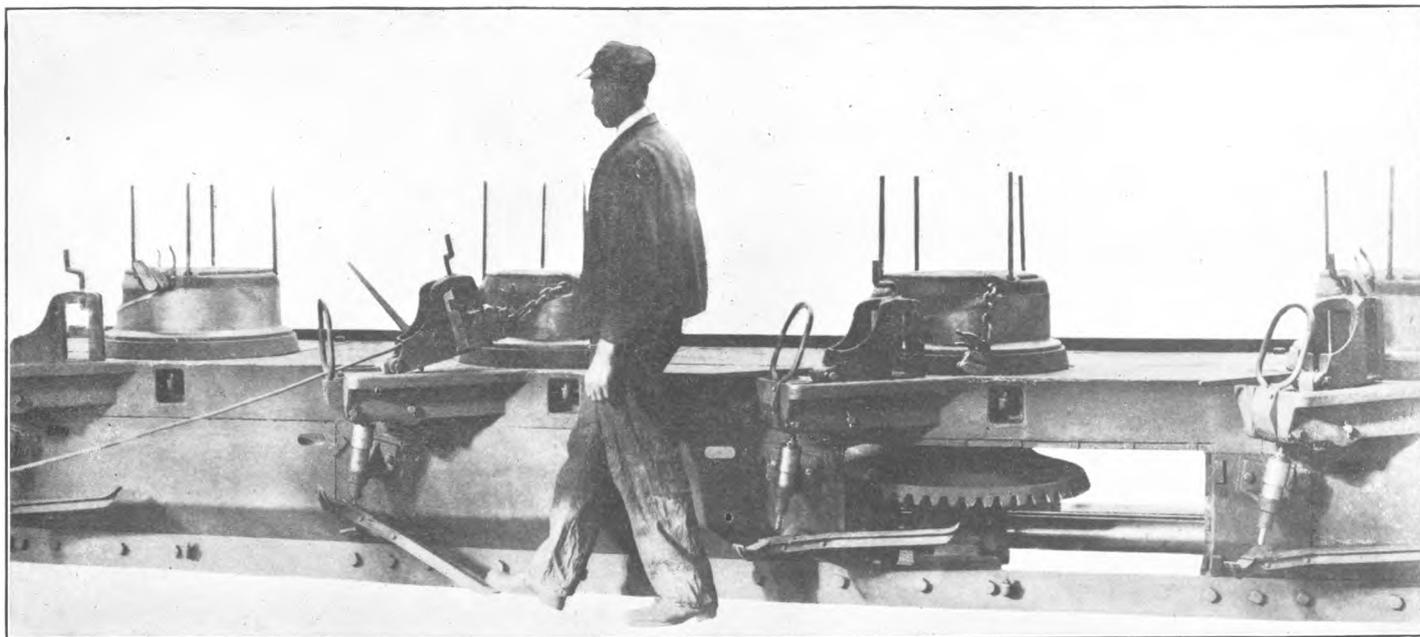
MODERN WIRE-DRAWING BENCH.
